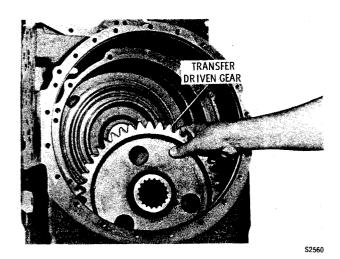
Removing transfer driven gear (-1 models with output disconnect or with no front output)
